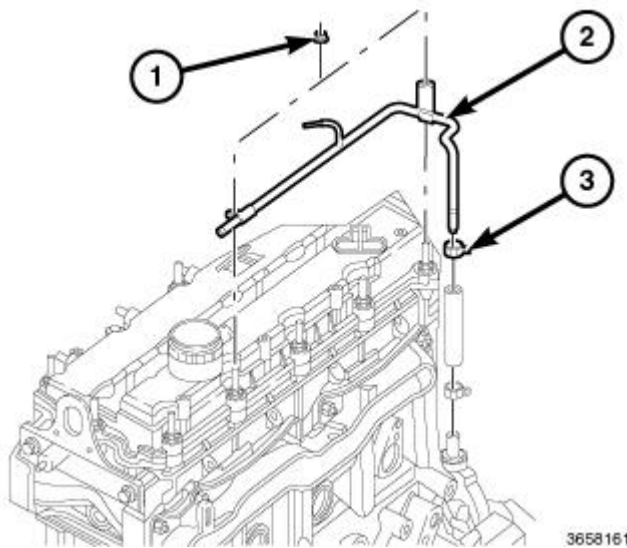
Vacuum Line, Retaining Nuts & Clamp
